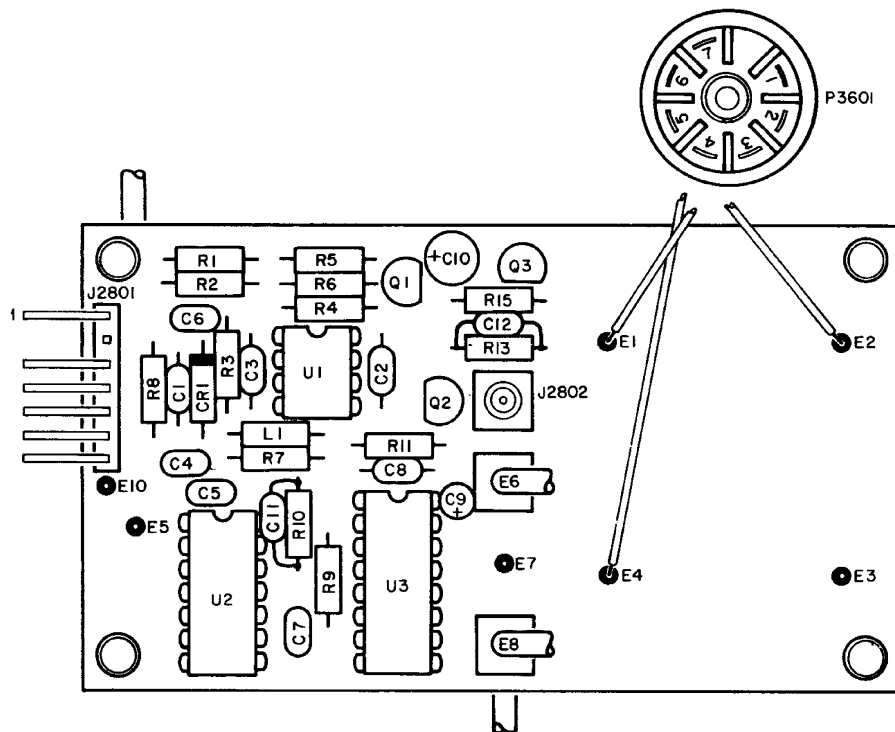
DVM I/O PC Board Assembly (Incl Option 10)
